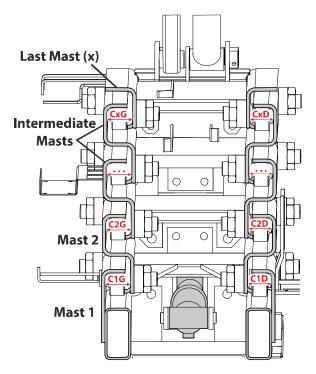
Bottom Rollers Mast Centering (Bottom View - Mast Raised)
